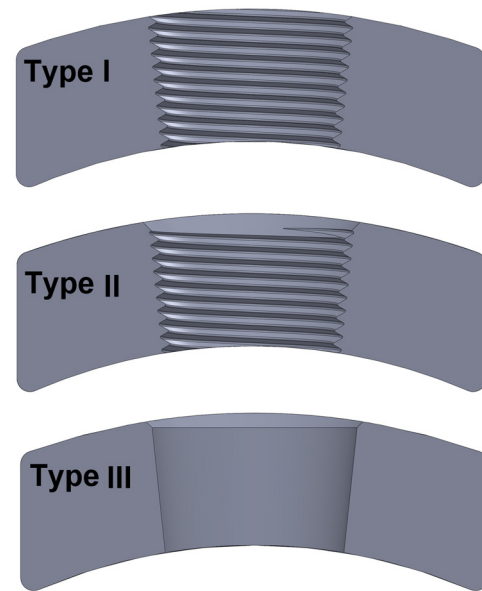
Three locking plate types with different screw thread designs: Type I with threaded holes and angle edge; Type II with threaded holes and chamfered edge; Type III with non-threaded holes and chamfered edge.
